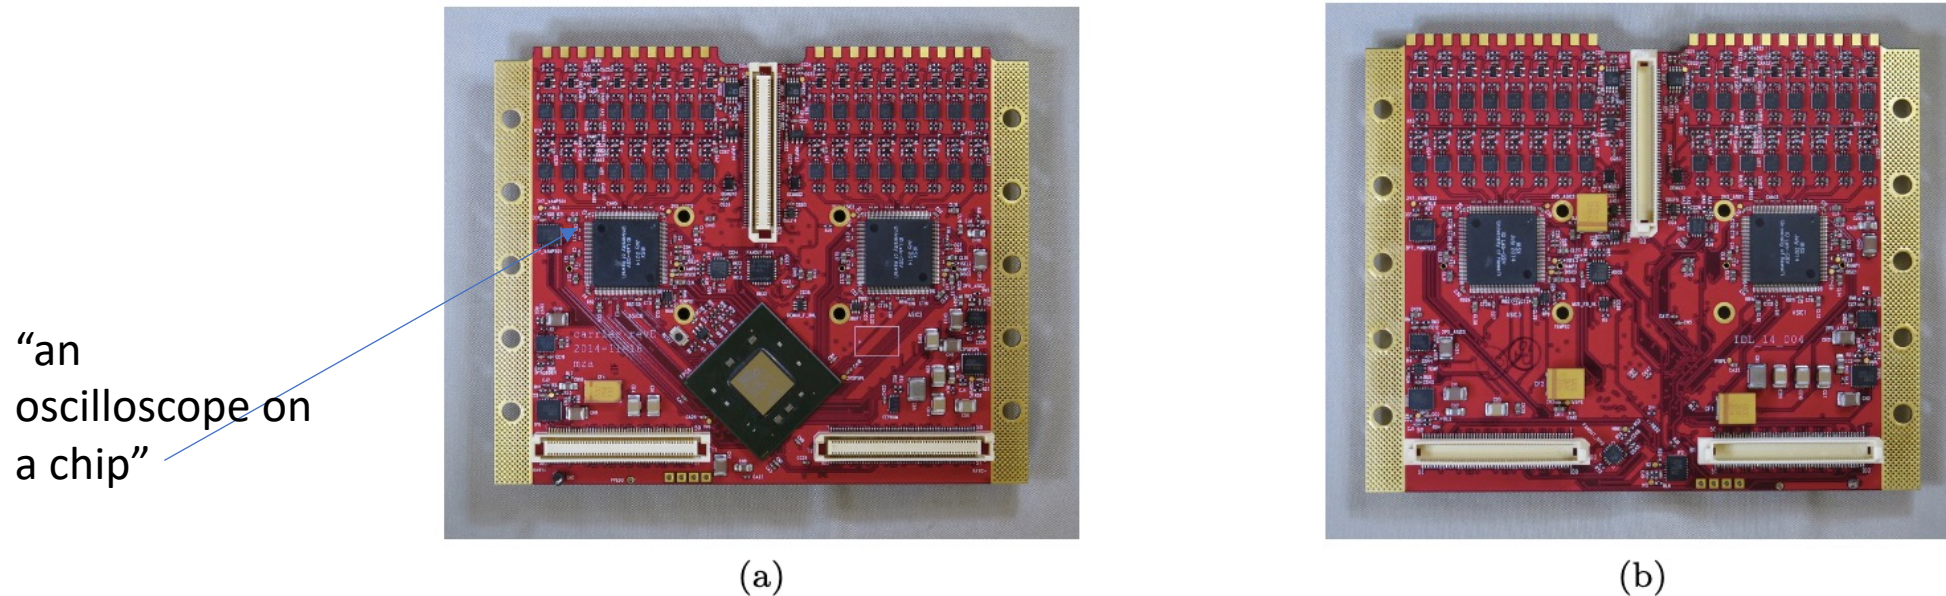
The ASIC carrier board. (a) top view and (b) bottom view of assembled module.
